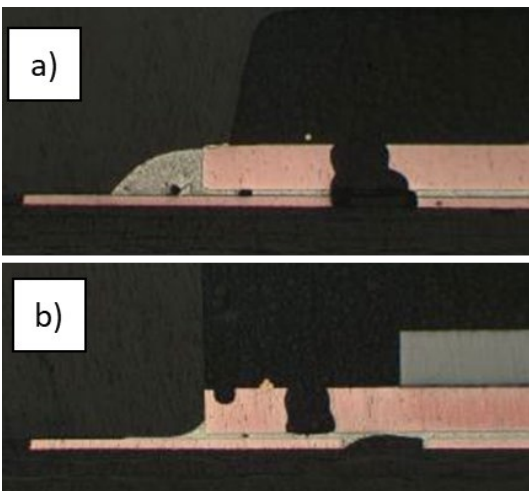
MLF-20 Solder Bridging Due to Component Dimension Issue; a) SnPb Solder, b) SAC305 Solder
